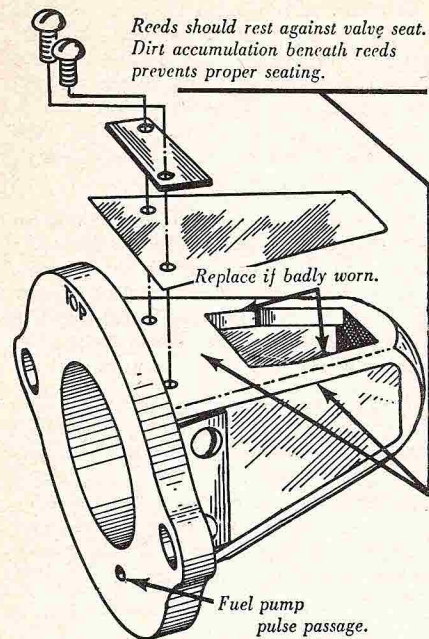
Pyramid type reed valve. If reed seating surfaces of adapter castings are worn reject the casting.
